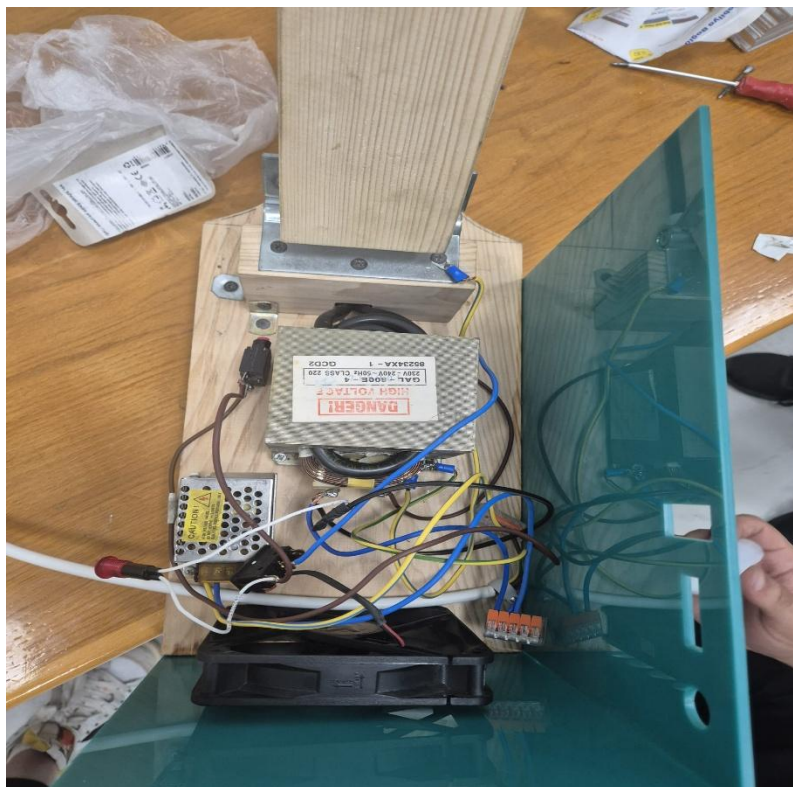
Prototype Spot Welding Machine Developed in This Study
